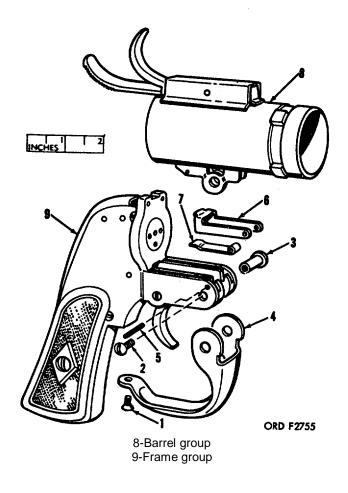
Pyrotechnic pistol AN-M8-exploded view.
